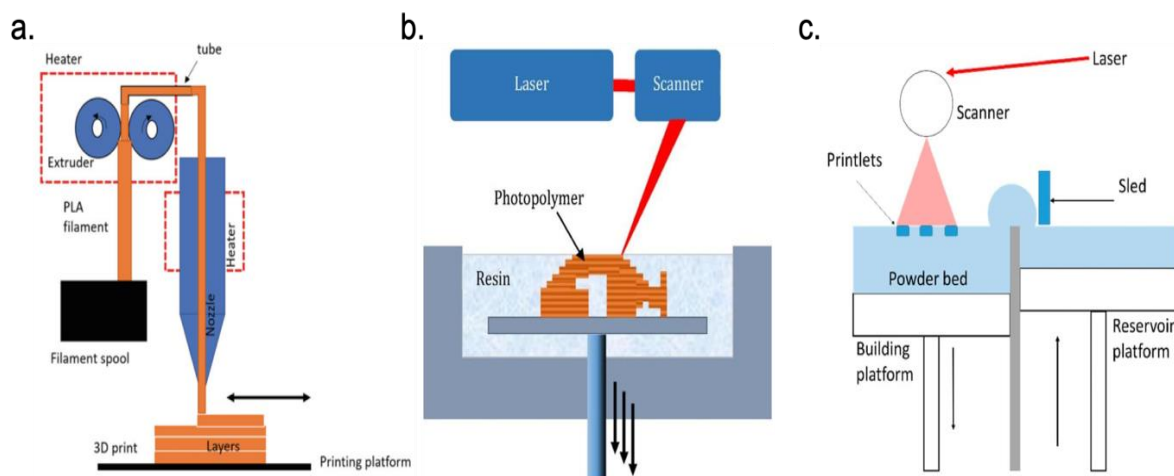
Additive manufacturing methods. (a) Fused Deposit Modelling (FDM) 3D printing, diagram modified from Mwema FM et al. [255]. (b) Stereolithography (SLA) 3D printing, diagram modified from Stansbury JW et al. [256]. (c) Selective Laser Sintering (SLA) 3D printing, diagram modified from Gueche, Y.A et al. [252]
